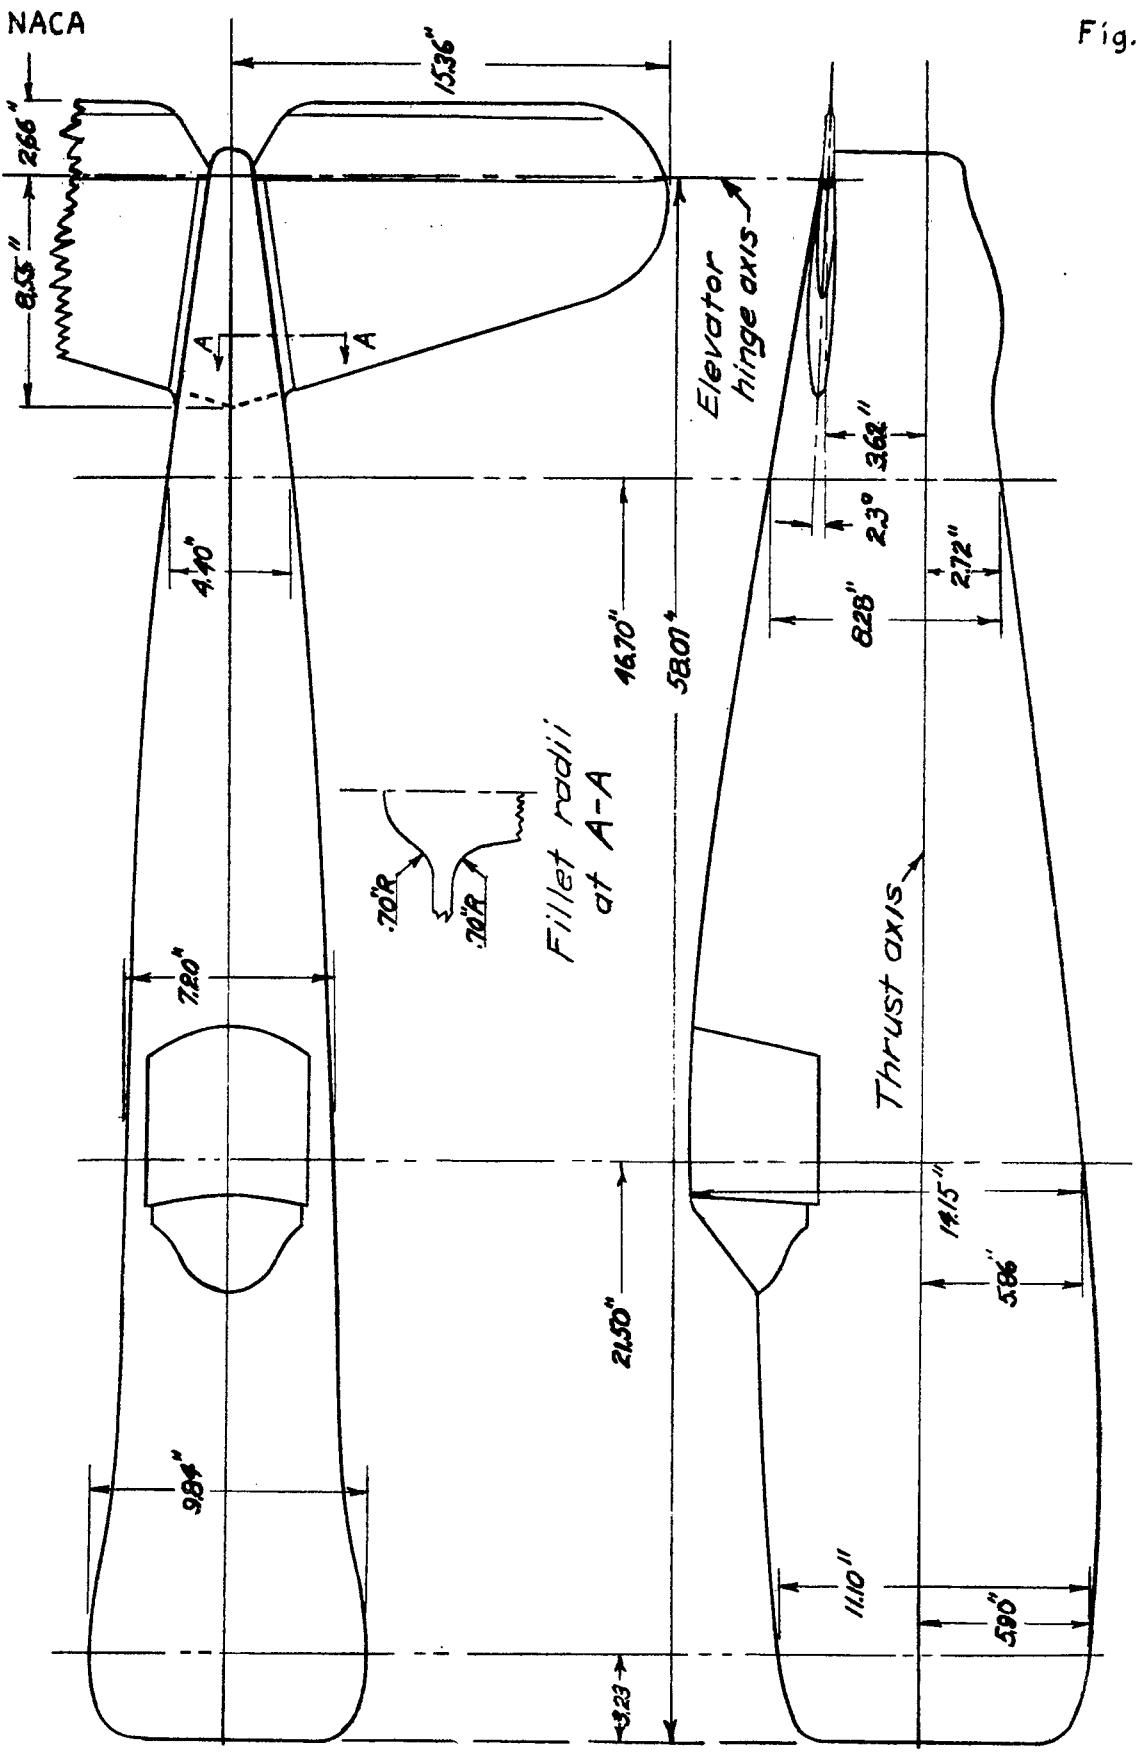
Horizontal tail mounted on a typical pursuit fuselage.
